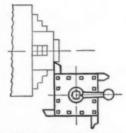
Side of tool is used to take a 1" deep broad-face cut.
